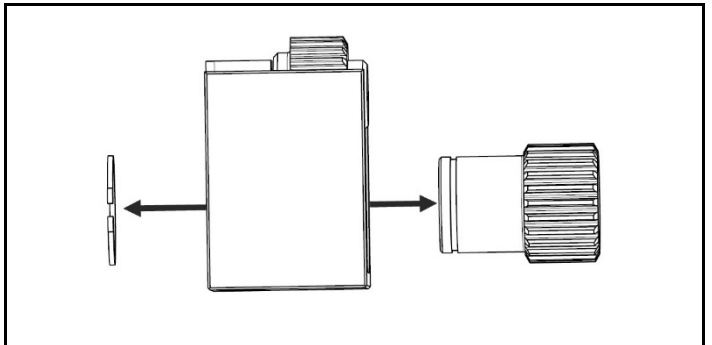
Remove Drive Gear Circlip and Drive Gear
